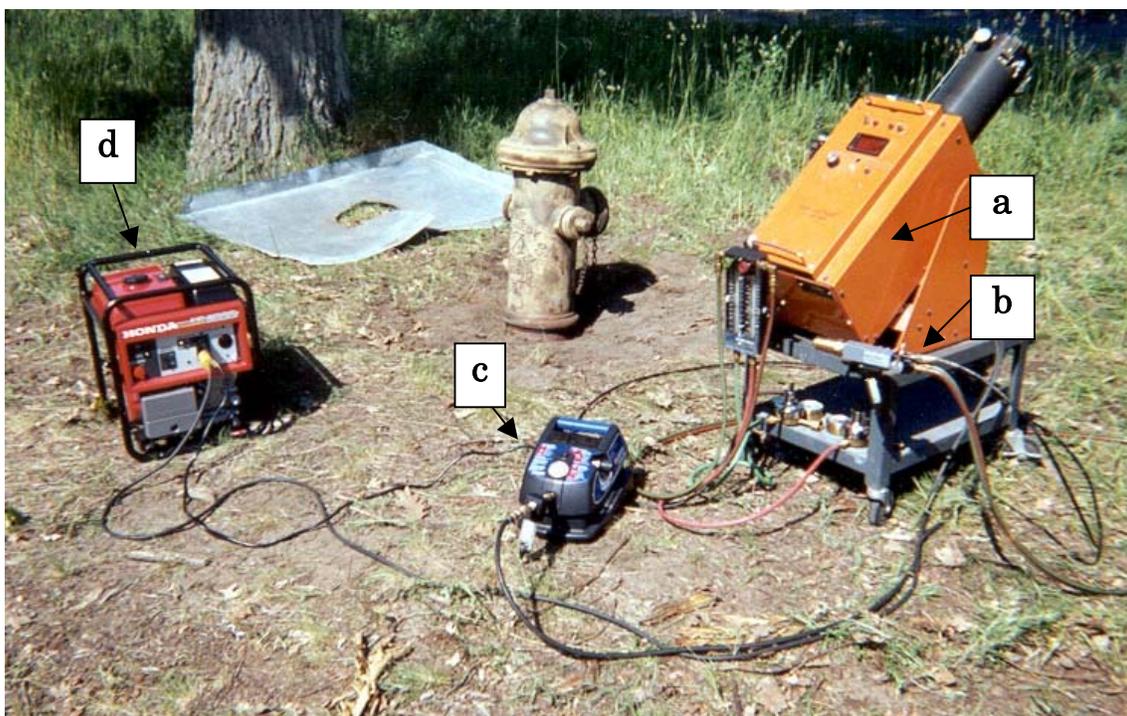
Equipment used for the TSV process staged at the Fort Drum demonstration area: (a) thermal mechanism powder feeder, (b) thermal spray torch, (c) air compressor, (d) portable power generator.
